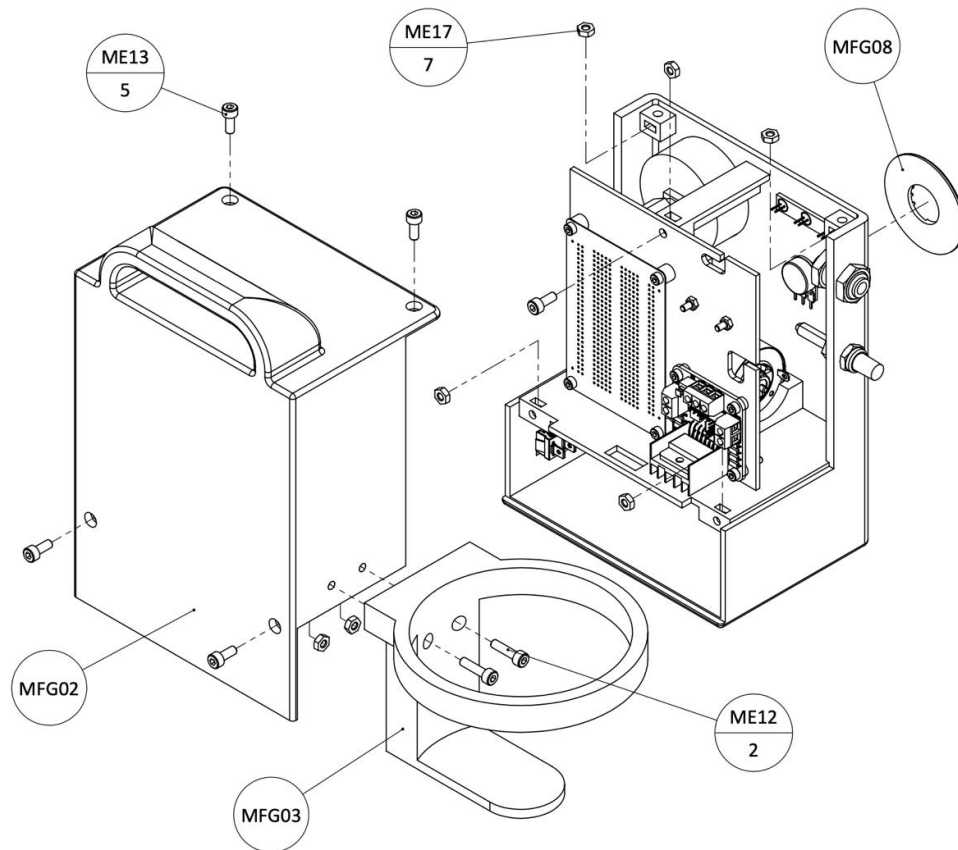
Instructions to assemble Back Housing and Canister Holder.
